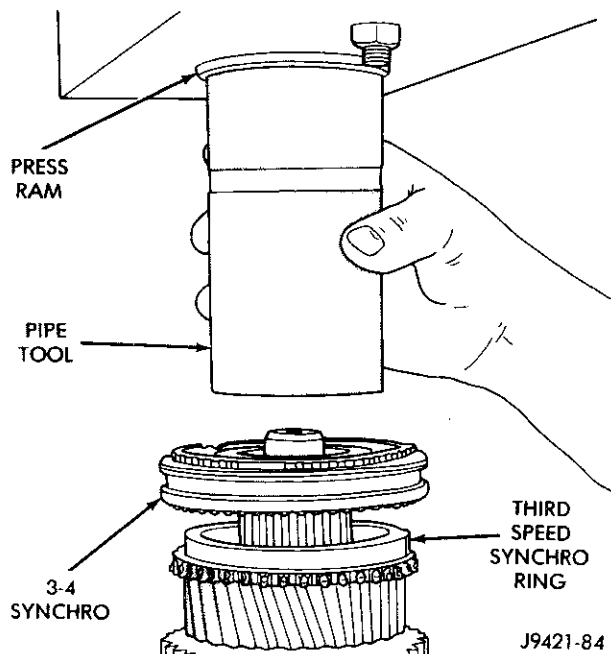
Pressing 3-4 Synchro Assembly On Output Shaft
